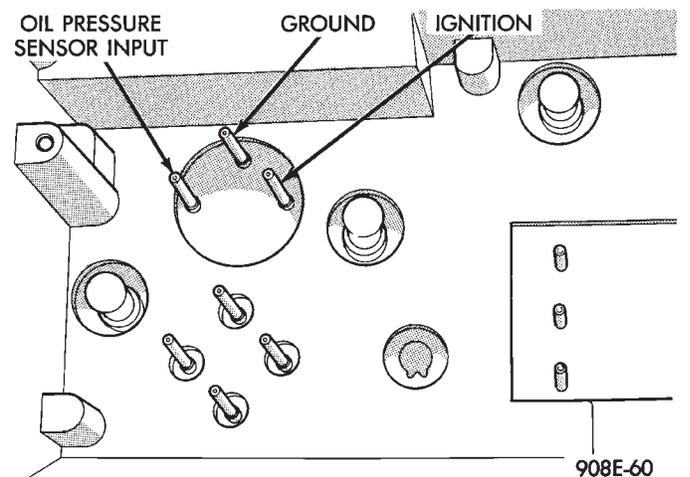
Oil Pressure Gauge Pins—With Tachometer
